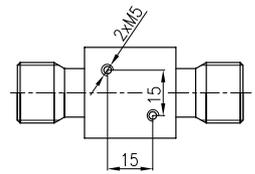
Angular valve (967 21..), dimensional drawing, scheme, application
